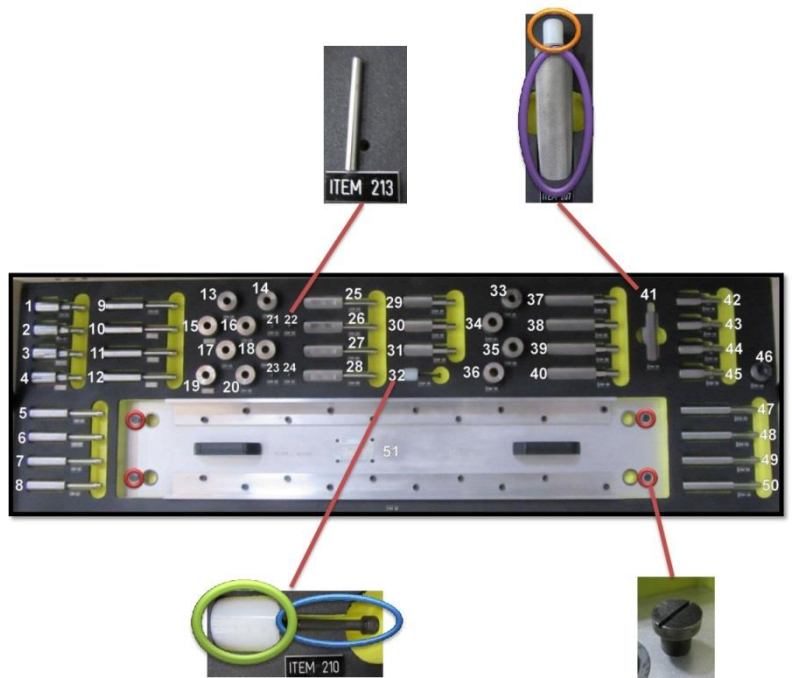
FIG. b – EXAMPLE OF COMPLETED TOOLBOX INVENTORY
